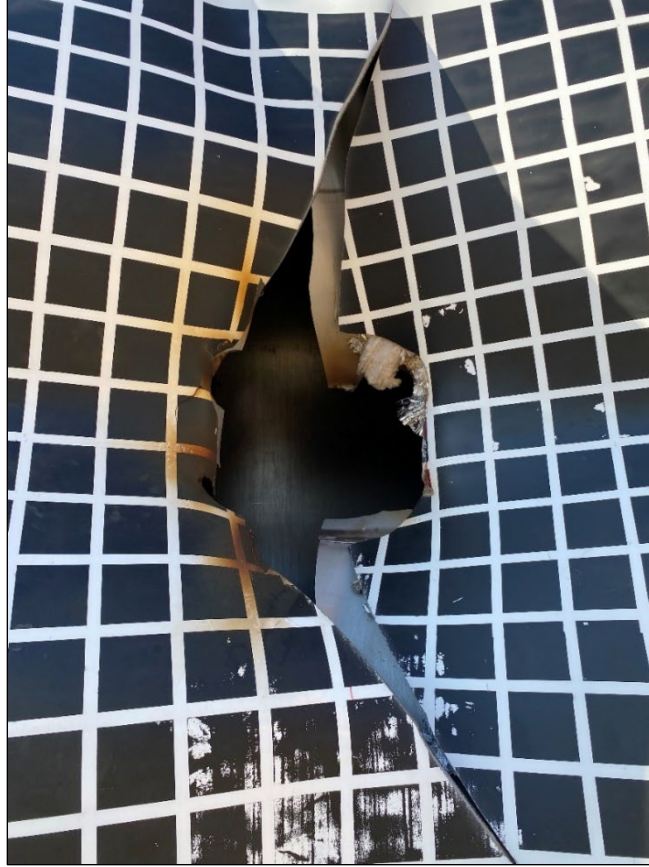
Close-Up View of Impact Zone after Separating from the Ram Car
